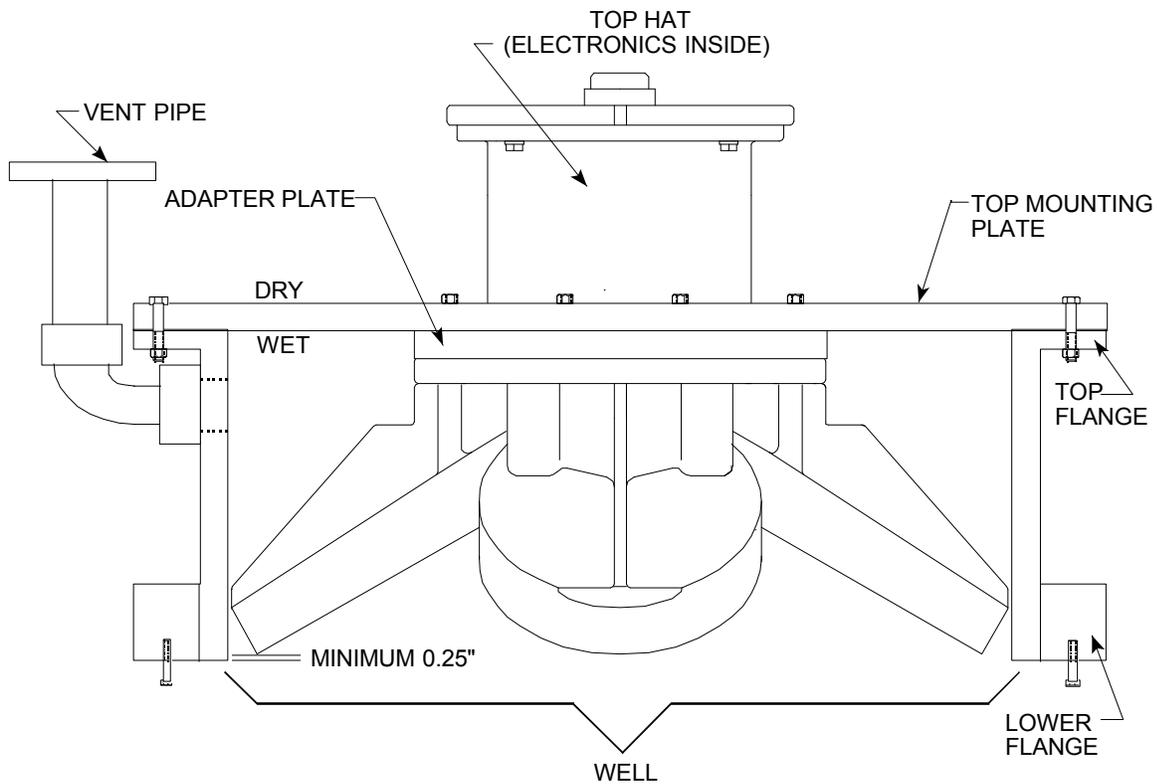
Sea Chest Mounted Transducer (With an Adapter Plate)
